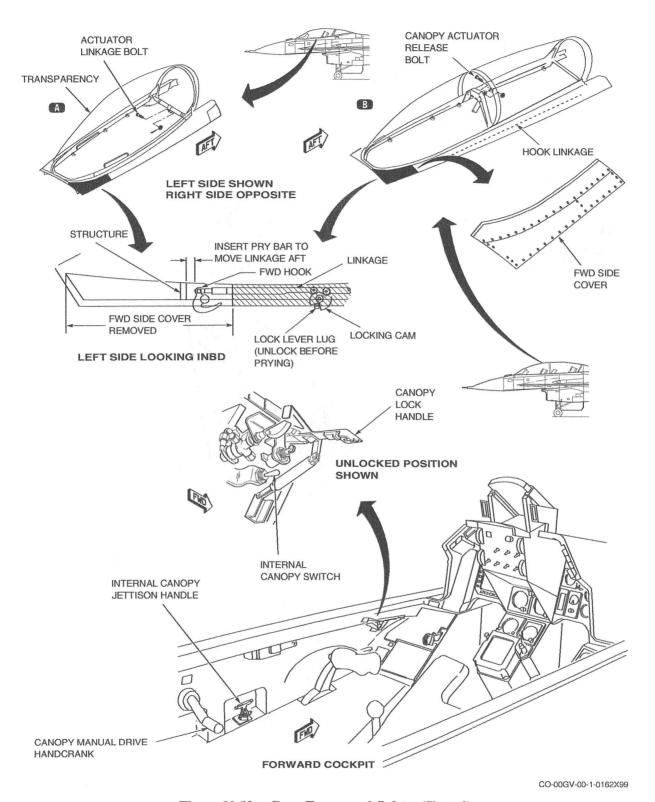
Crew Escape and Safety. (Sheet 3)
